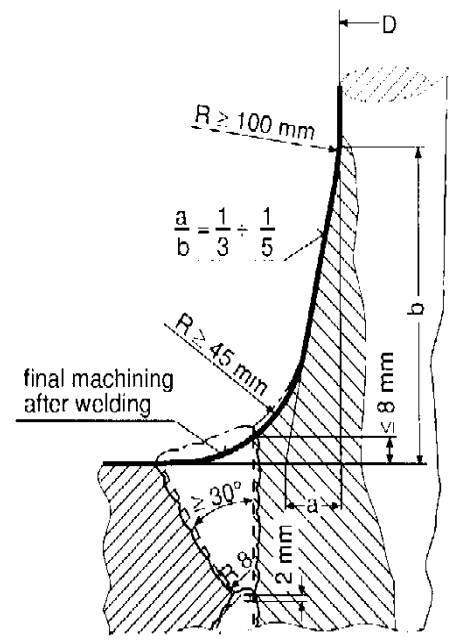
Welded joint between rudder stock and coupling flange
